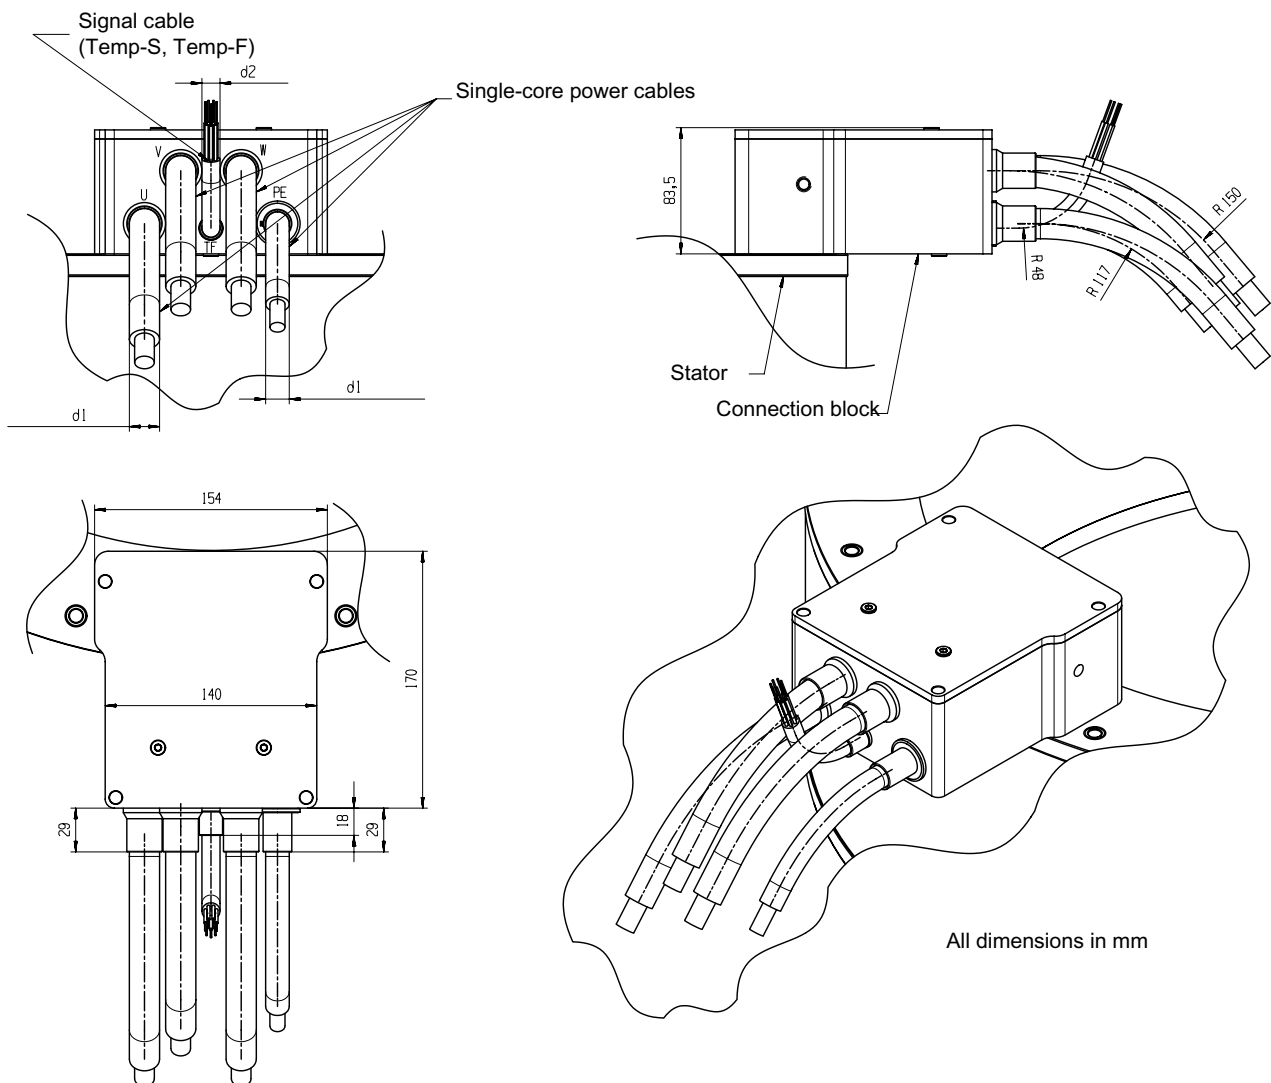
Radial electrical connection towards the outside with sleeve and single core for 1FW6290, 70 mm² core cross-section
